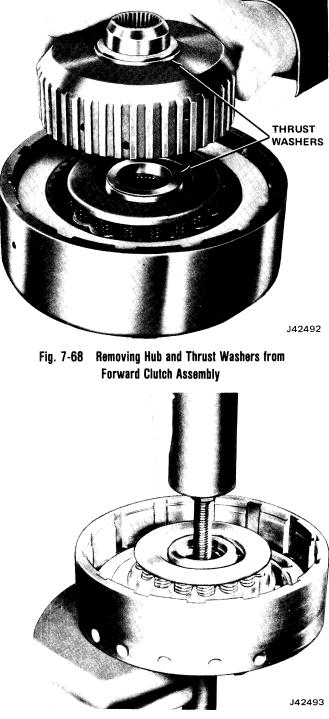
Pressing Turbine Shaft Out Of Forward Clutch Housing
